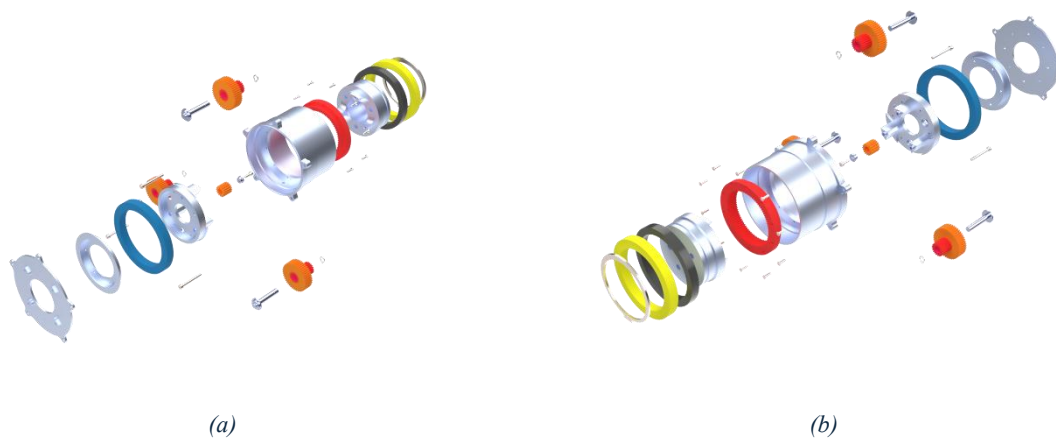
Gearbox Isometric View (a) Rear (b) Front
